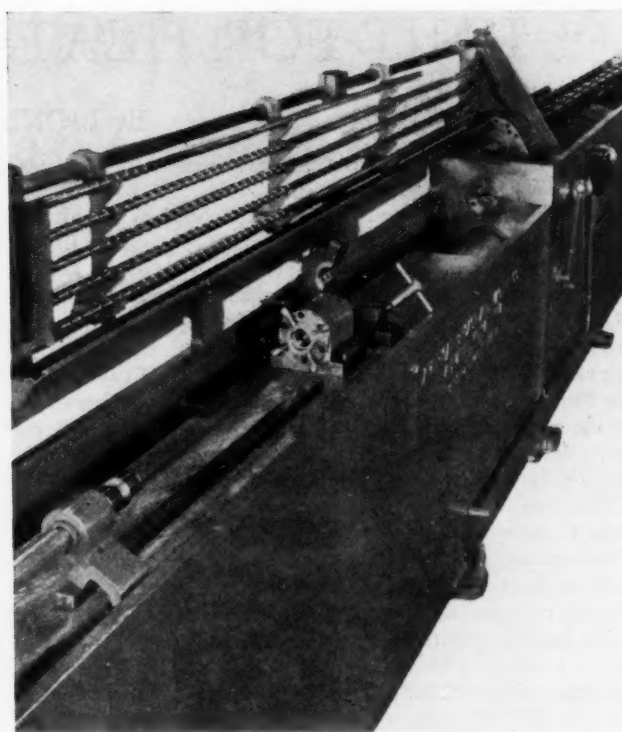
AMERICAN BROACH & MACHINE COMPANY MACHINE FOR 20-MM BARRELS
